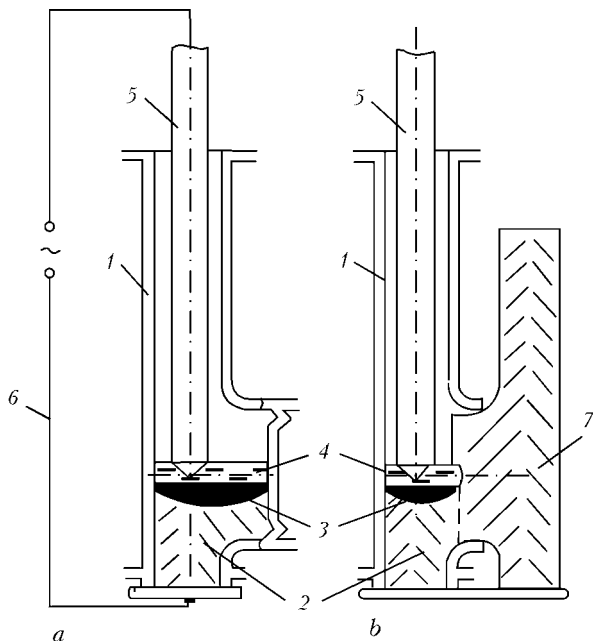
Scheme of crankshaft manufacturing: *a* — melting of first cheek of crankshaft with crankpin; *b* — melting of second cheek with melting it to crankpin; 1 — mould; 2 — billet being melted; 3 — metal pool; 4 — slag pool; 5 — consumable electrode; 6 — power source; 7 — part being melted together
